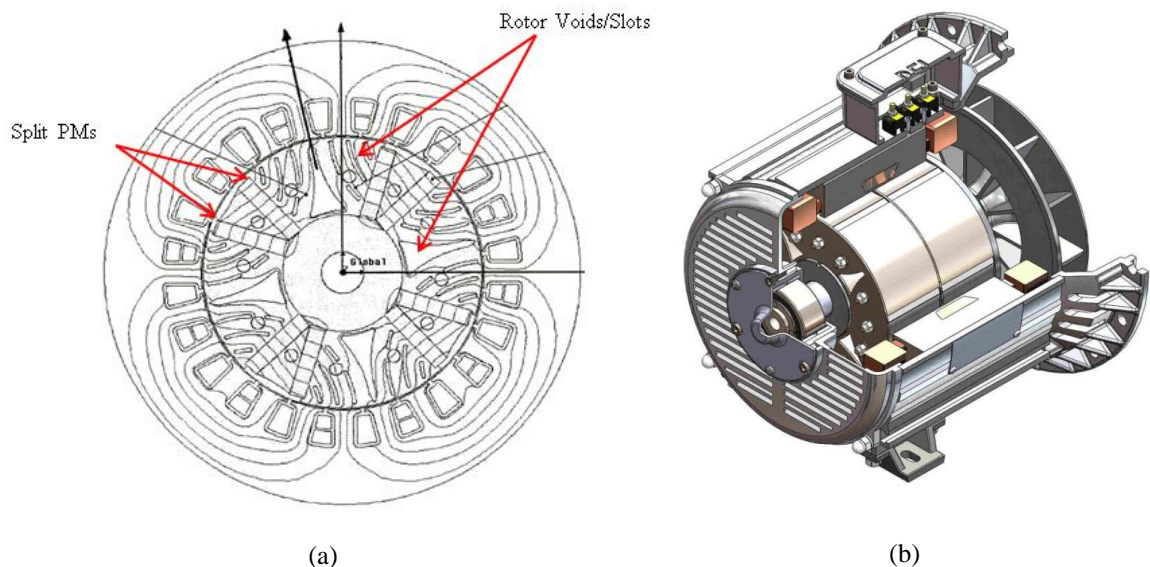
The 16-kW spoke-type IPM generator, (a) example of calculated flux under the loaded condition, (b) picture of the assembled machine [24].
